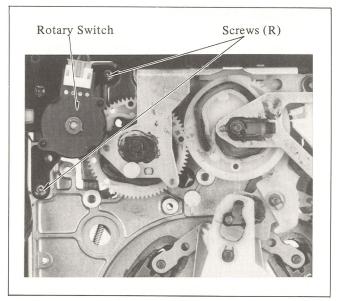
Assembly and Adjustment of Gears and Rods—(11)
